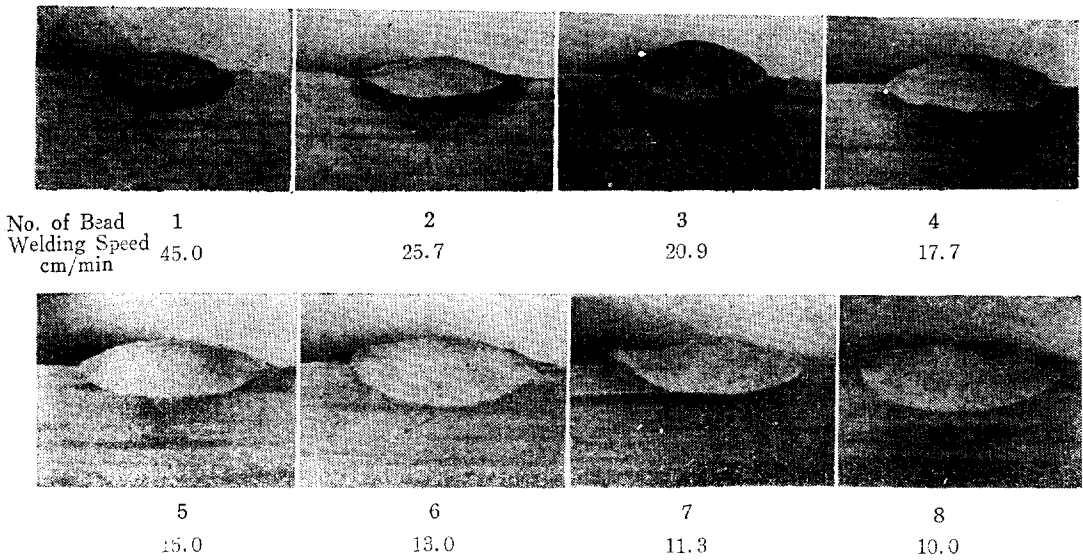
Macro pictures showing different penetrations by different welding speeds.(2×)
